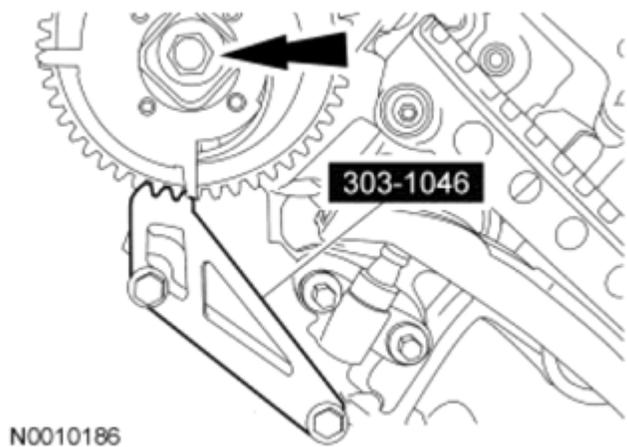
Locating Camshaft Phaser Sprocket Bolt
